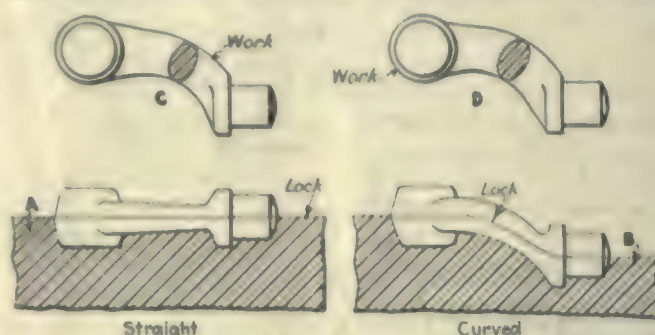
STRAIGHT AND CURVED LOCKS USED IN FORGING DIES
